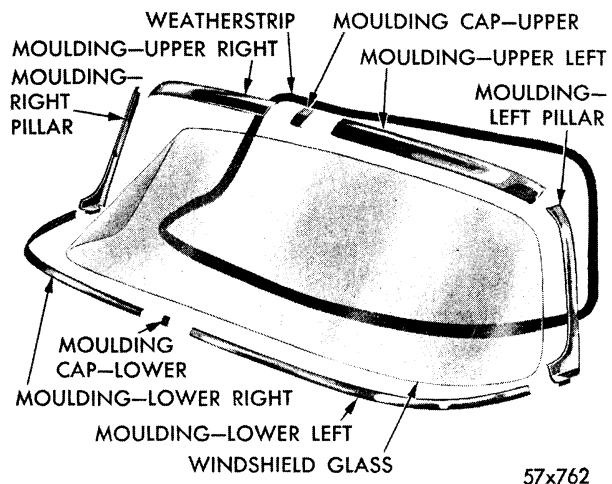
Windshield and Moulding Assembly (Imperial Models)
